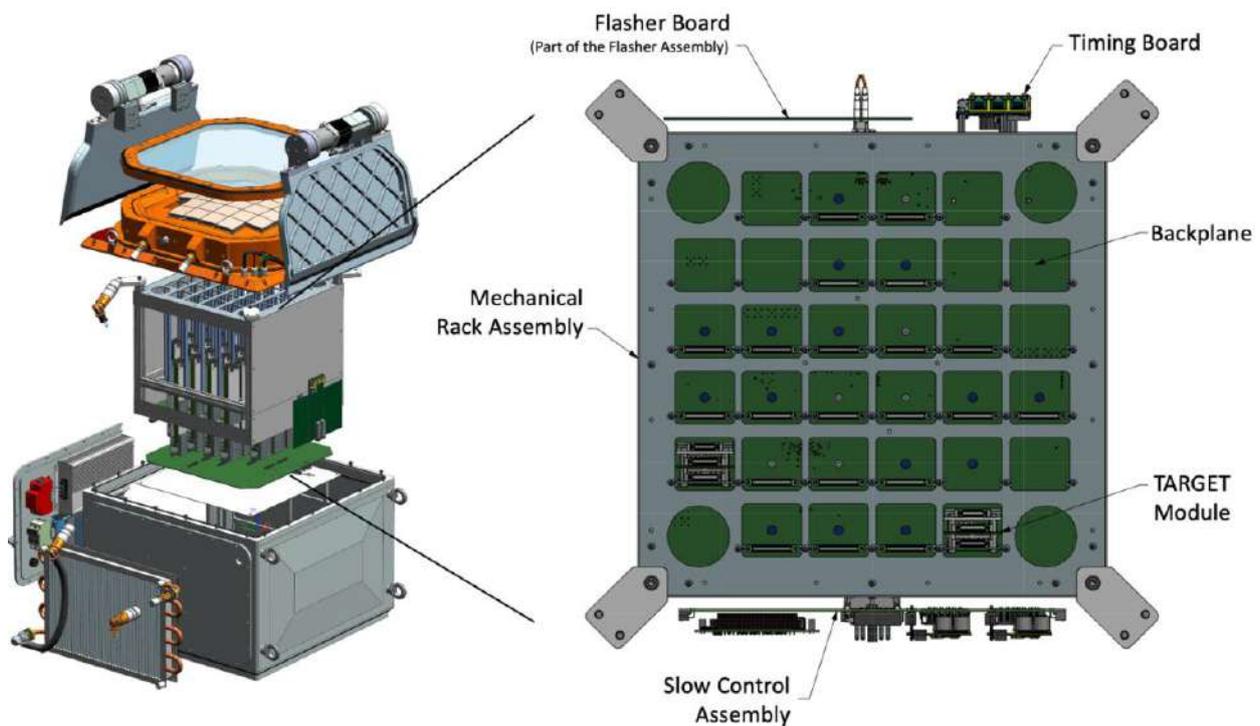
Electronics Rack Assembly, shown in context of the full Camera CAD. Note: not all TARGET Modules or connectors on the Backplane are shown.
